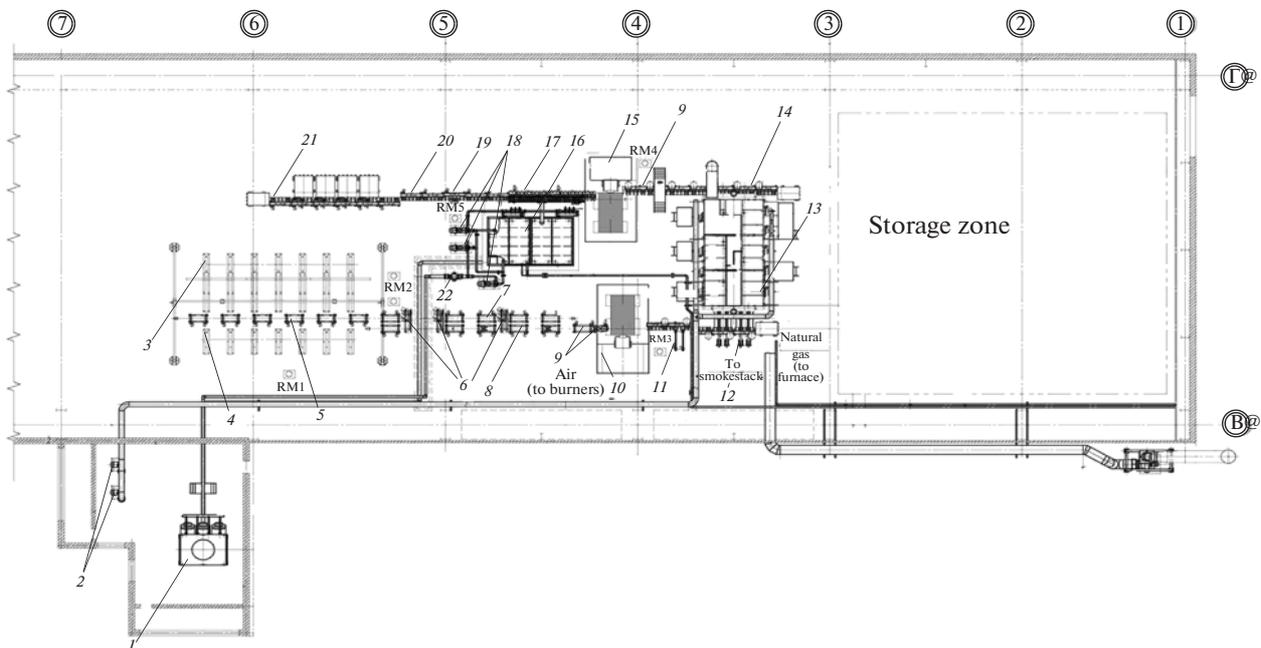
Department for quenching of fishtails at OOO NSMZ: 2) furnace fan; 6) tipping system; 7) roller conveyor for inspection of blank; 11) reversing unit; 12) furnace-charging conveyor; 14) discharge roller conveyor; 16) water tank; 18) pumps; 19) tipping unit; 20) roller conveyor. The other notation is explained in the text.
